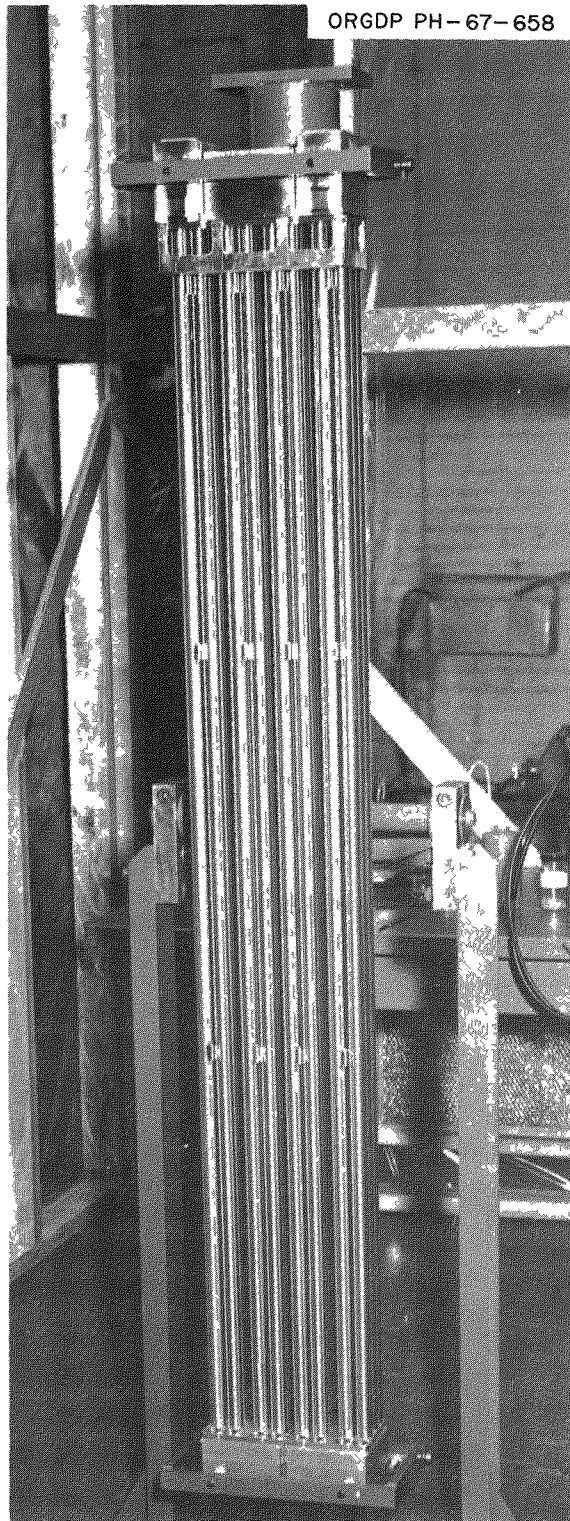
Overall View of Prototype Pressure Shell in Assembly Jig.
